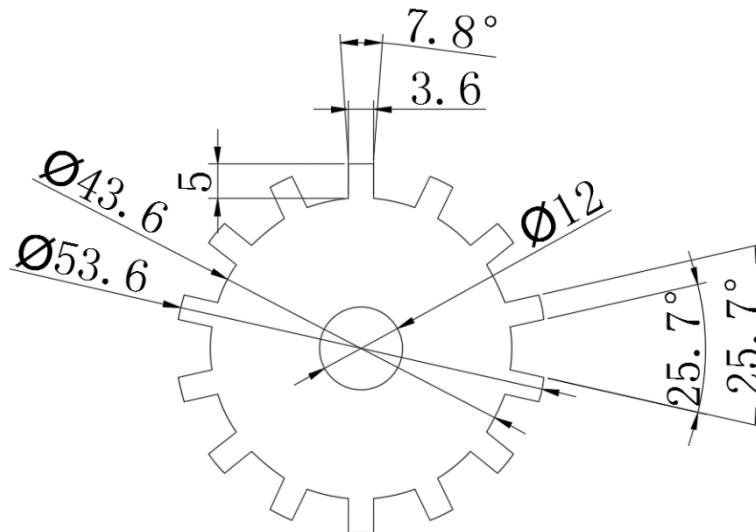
14-pole rotor dimensions for both SPM- and CPM-FRPM machines.
